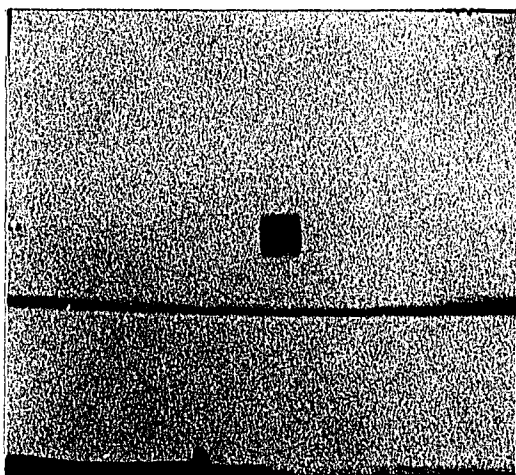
Real-time radiograph of aluminum cylindrical sample
